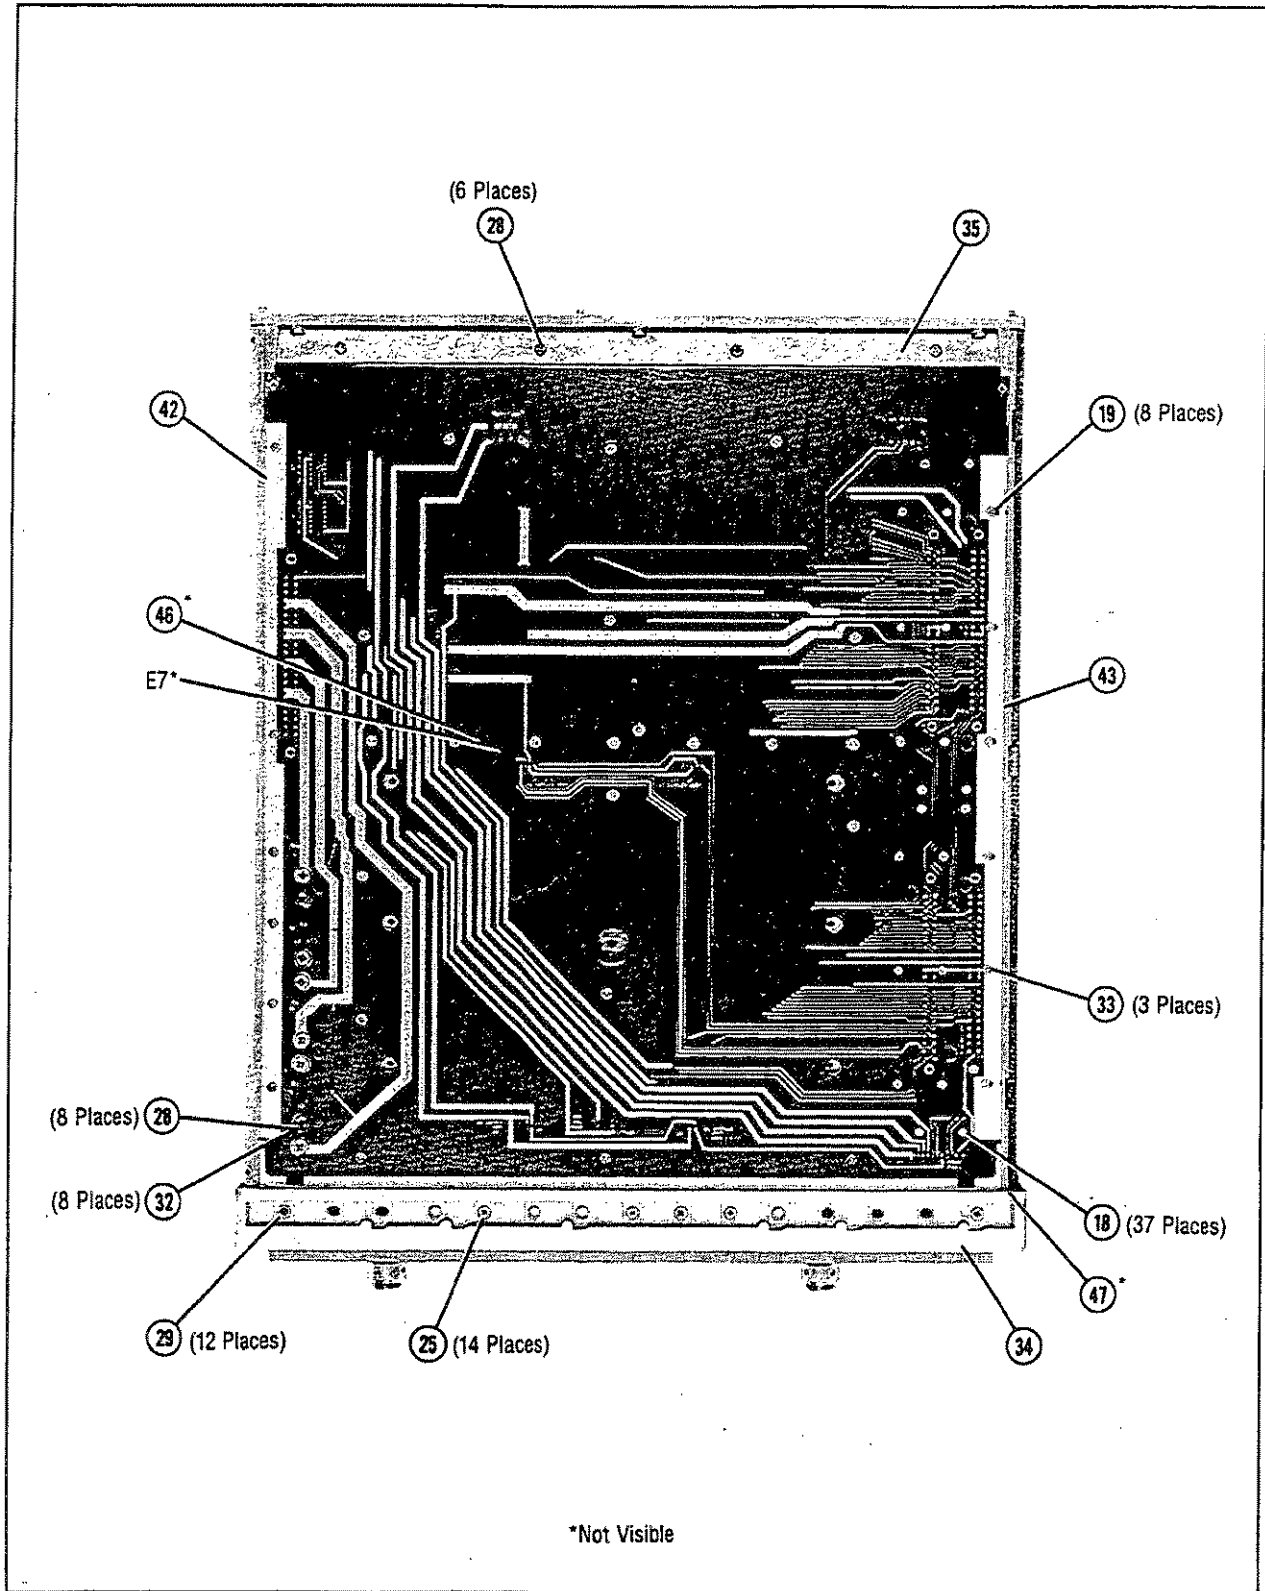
HP 8515A Miscellaneous Mechanical, Chassis, and Electrical Parts (3 of 5)
